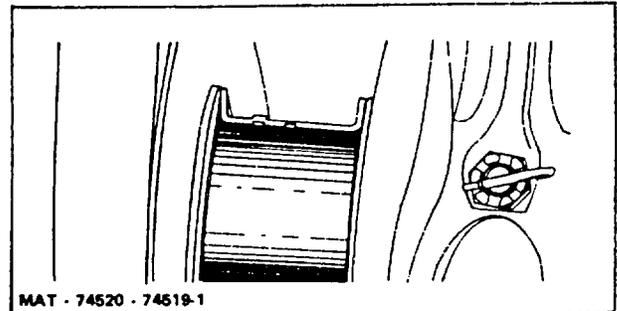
Flanged Bearing Controls Crankshaft End Play.
